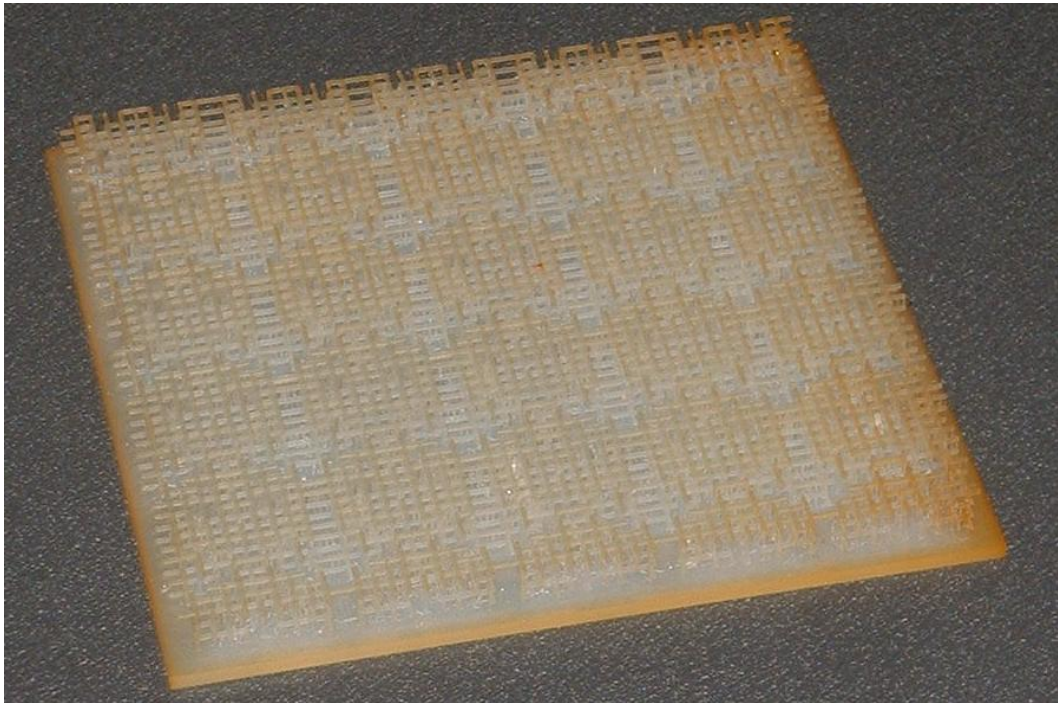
Second Three Dimensional Design Made From 8120 Resin
